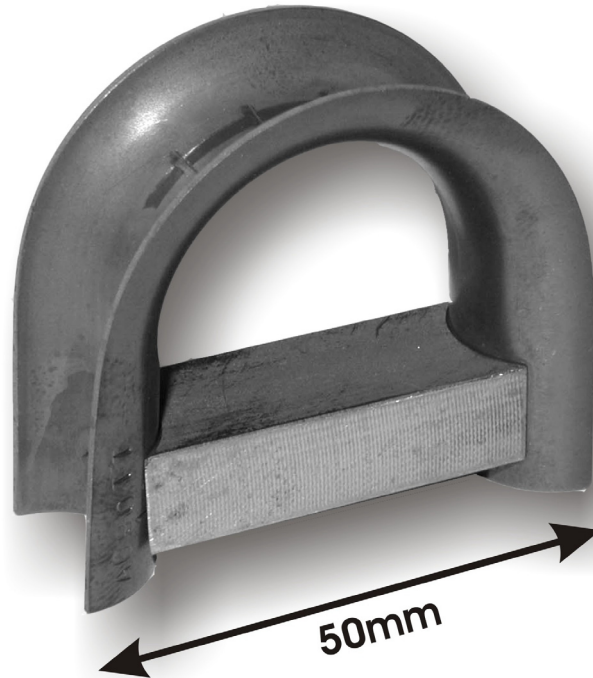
Typical RUB specimen manufactured by bending a split SG tube.
